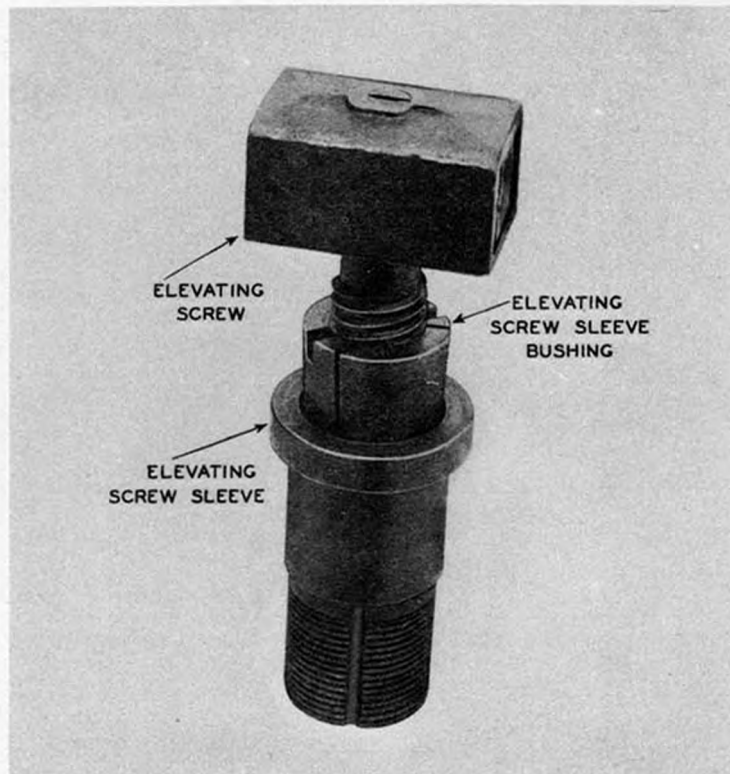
Elevating screw sleeve bushing partly unscrewed from the elevating screw sleeve with elevating screw in the elevating screw sleeve bushing.
